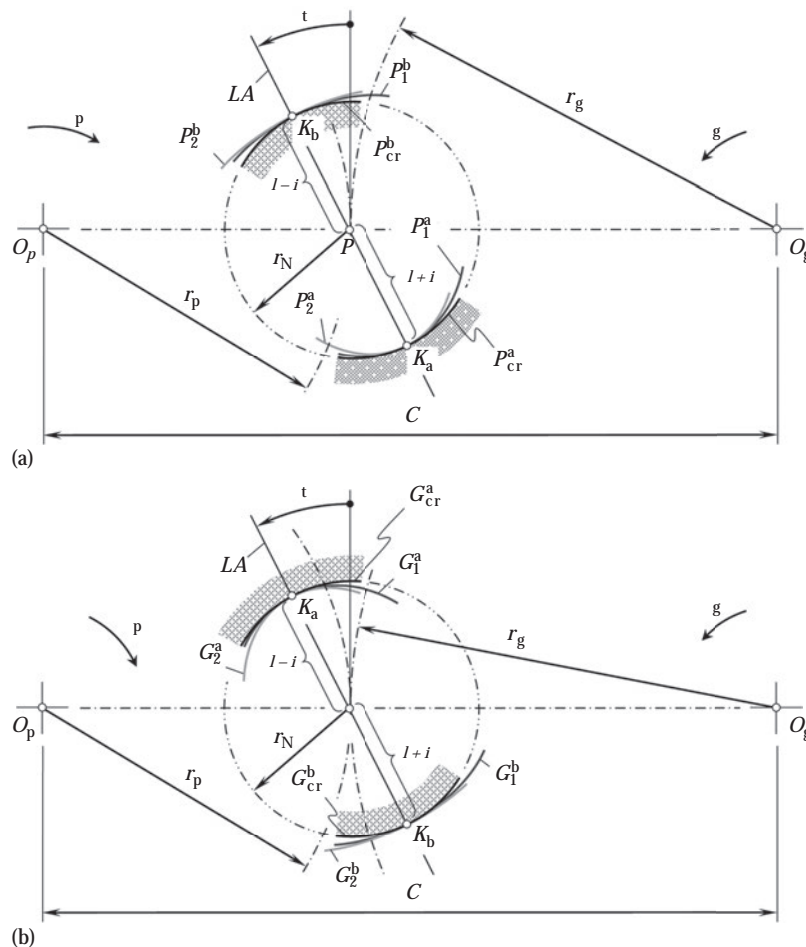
Examples of possible tooth flank geometries for Novikov gearing: possible shapes of teeth flanks (a) of a pinion and (b) of a mating gear.
